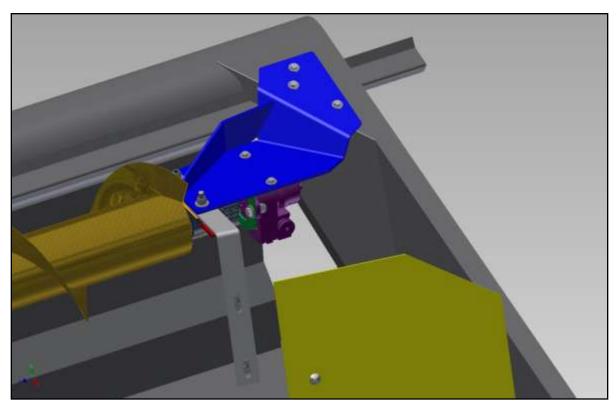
ASSEMBLY LEFT END WITH MOTOR
